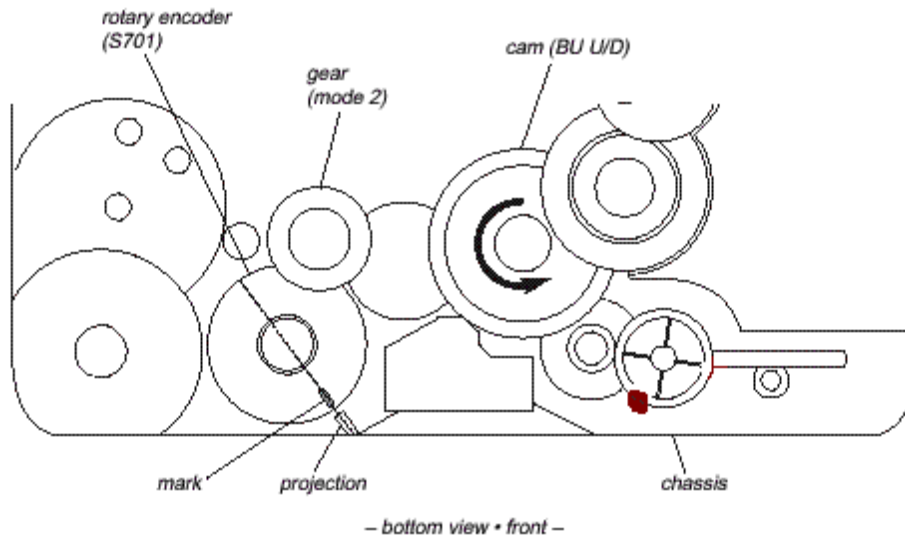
ROTARY ENCODER 2 - FOR CLAMPING / STACKER LOADING
